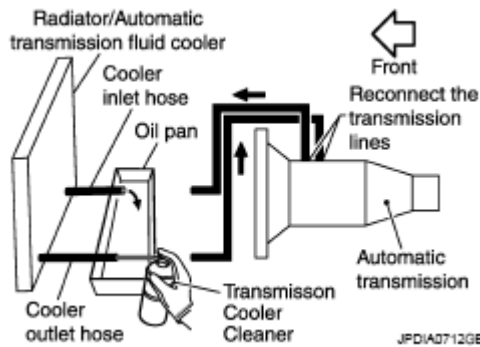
Inserting Extension Adapter Hose Of Can Of Transmission Cooler Cleaner (Nissan P/N 999MP-AM006) Into Cooler Outlet Hose
